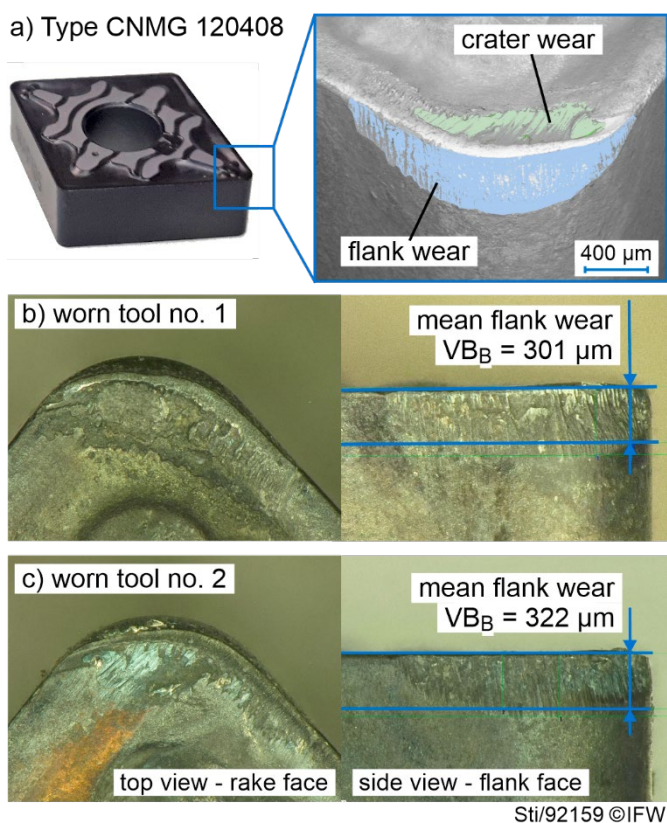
Indexable inserts used for validation: (a) different types of wear, (b) top view with crater wear and side view with flank wear for tool no. 1 and (c) for tool no. 2
